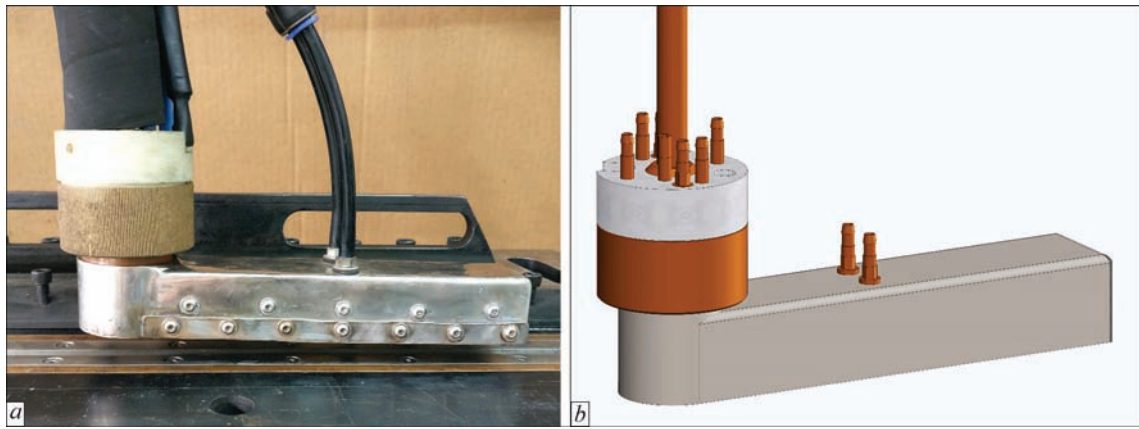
Appearance (a), and schematic (b) of the torch for robotic hybrid plasma-arc welding with additional shielding nozzle
